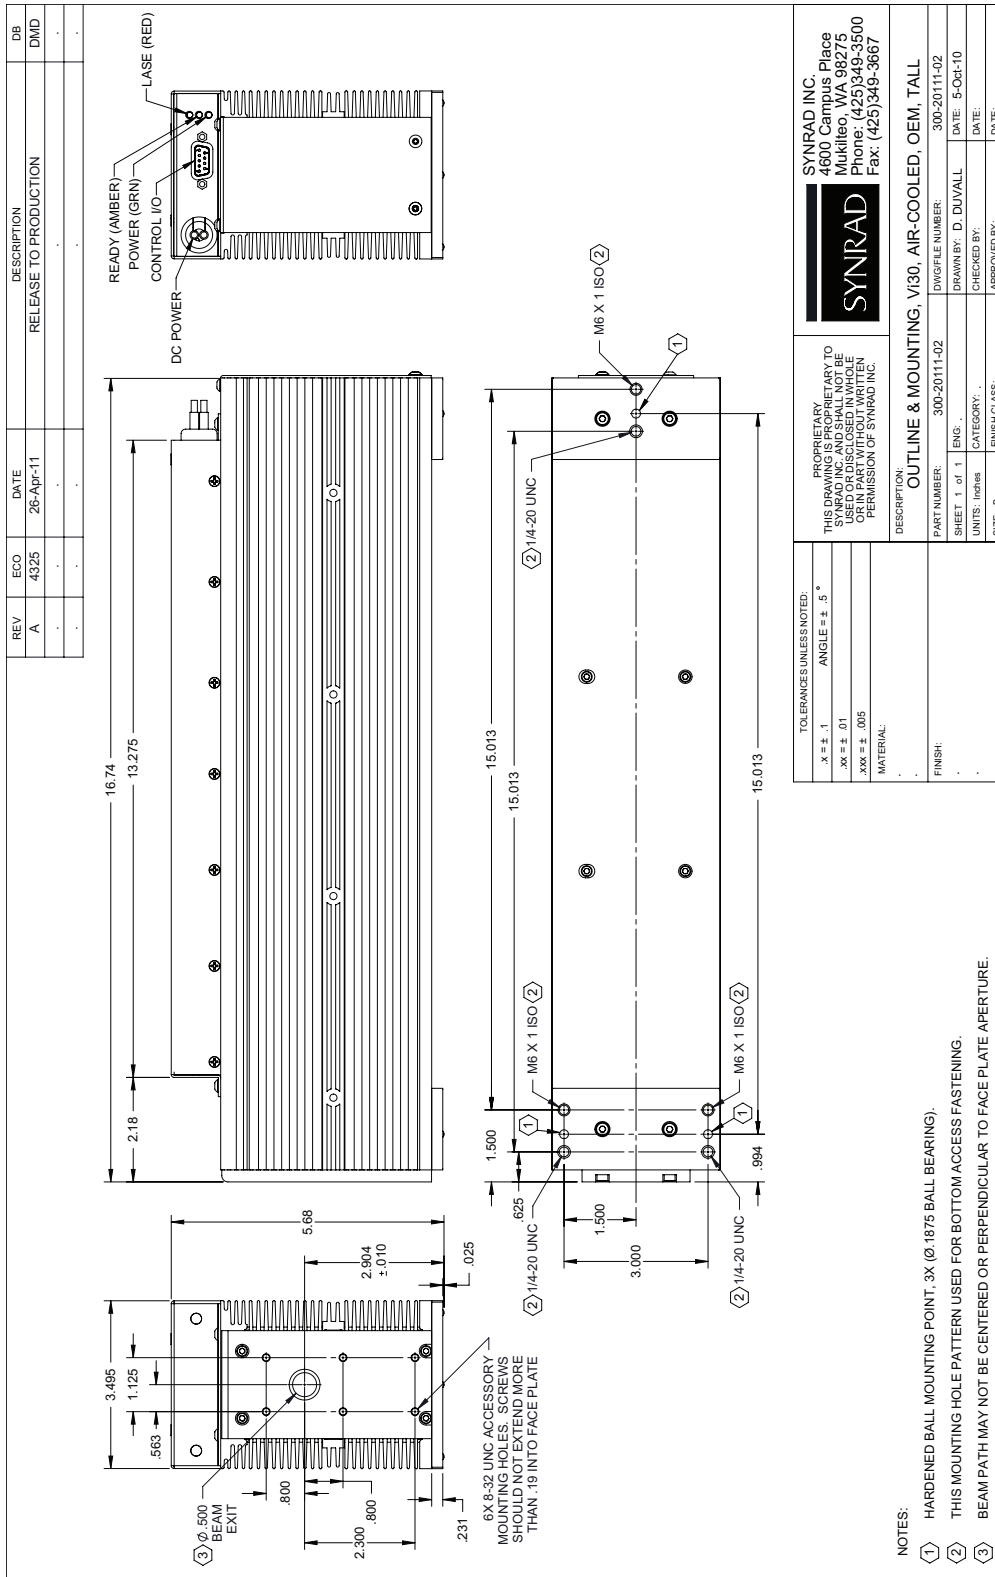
Firestar OEM vi30 package outline and mounting dimensions – with optional customer-installed ‘Tall’ mounting feet
